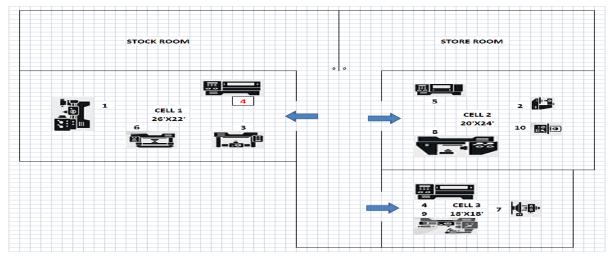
Cell layout design for Bench mark problem 4-10machines x 12 components Bench mark problem
